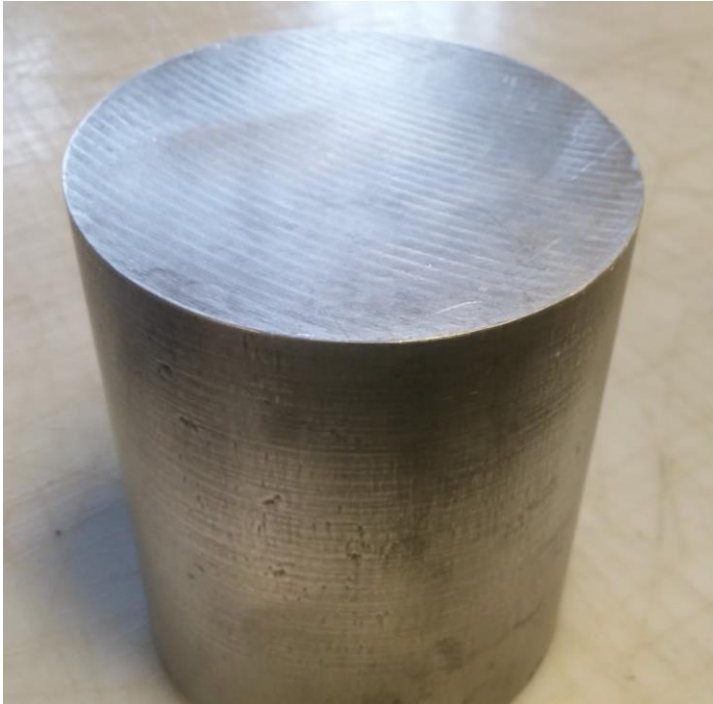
Aluminum cylinder used as the mold for the catch cans.
